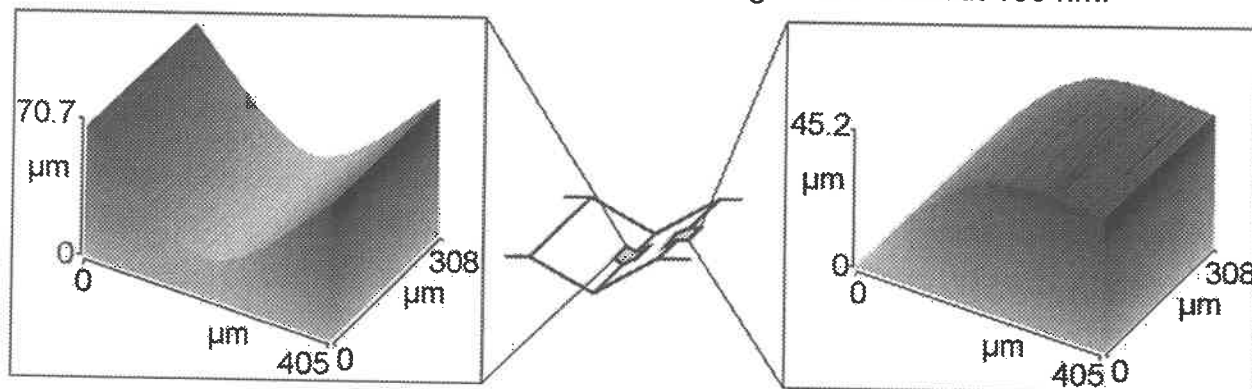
Abrasive flow machined V-groove in steel, bottom (left) and top (right) of groove.
